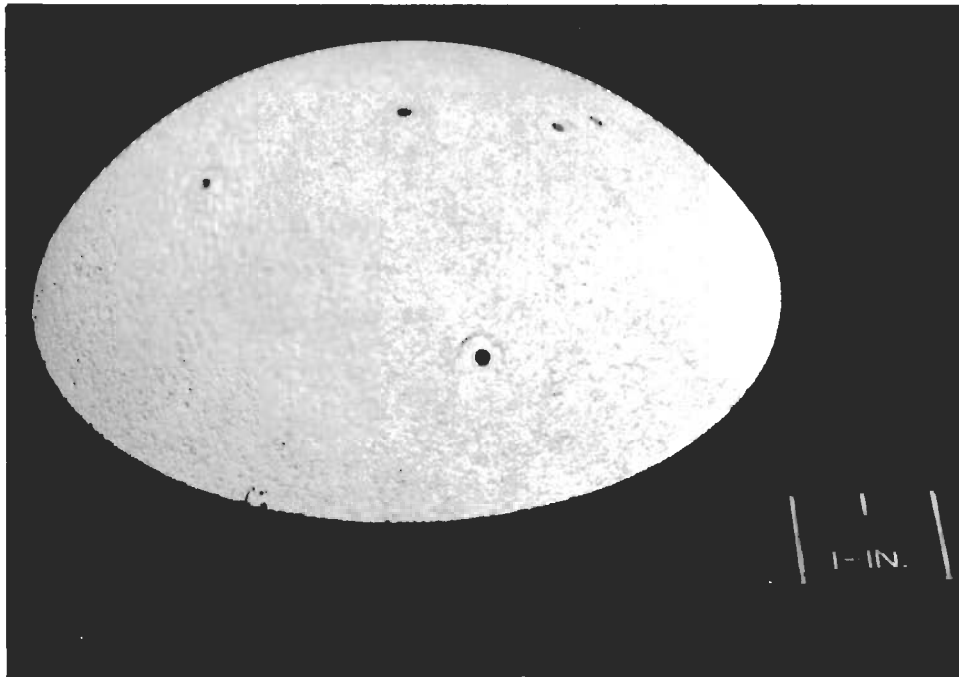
APPEARANCE OF COATING SO-86 AFTER MACHINING
